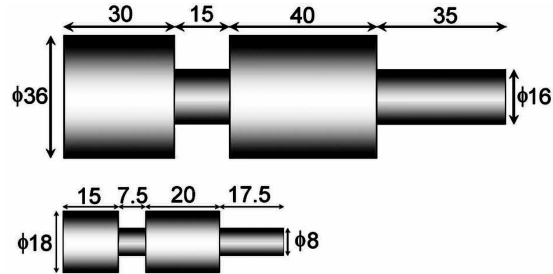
Geometrical dimensions [in mm] of big and small shaft
